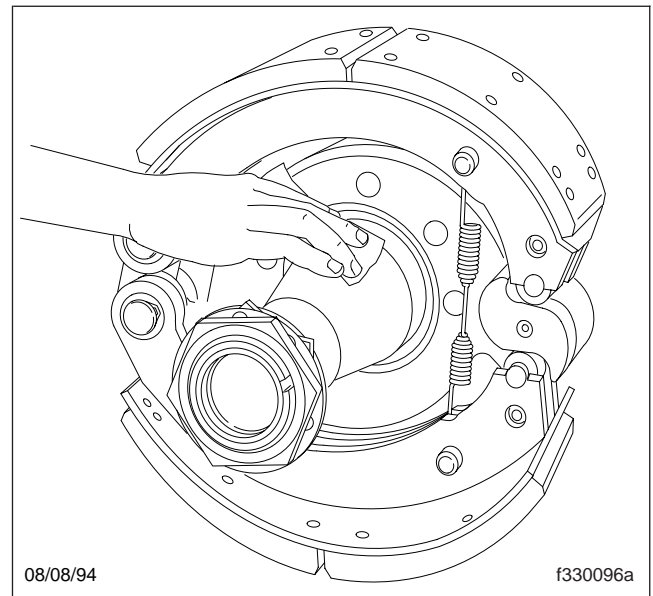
, Clean and Inspect the Axle Spindle
